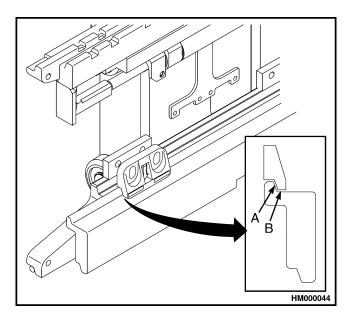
Lower Mounting Hooks Wear Limit and Clearance Adjustment
